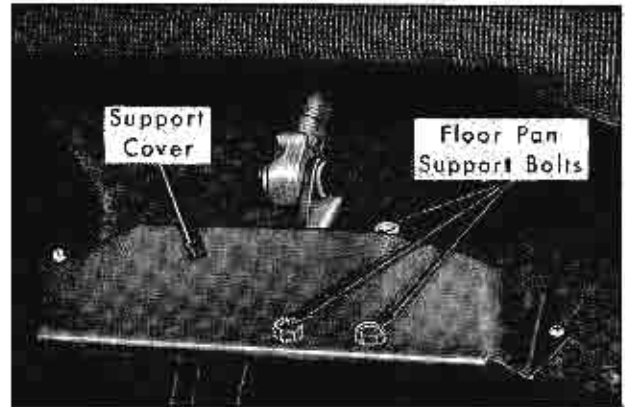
Horizontal Regulator Floor Pan Support Cover
